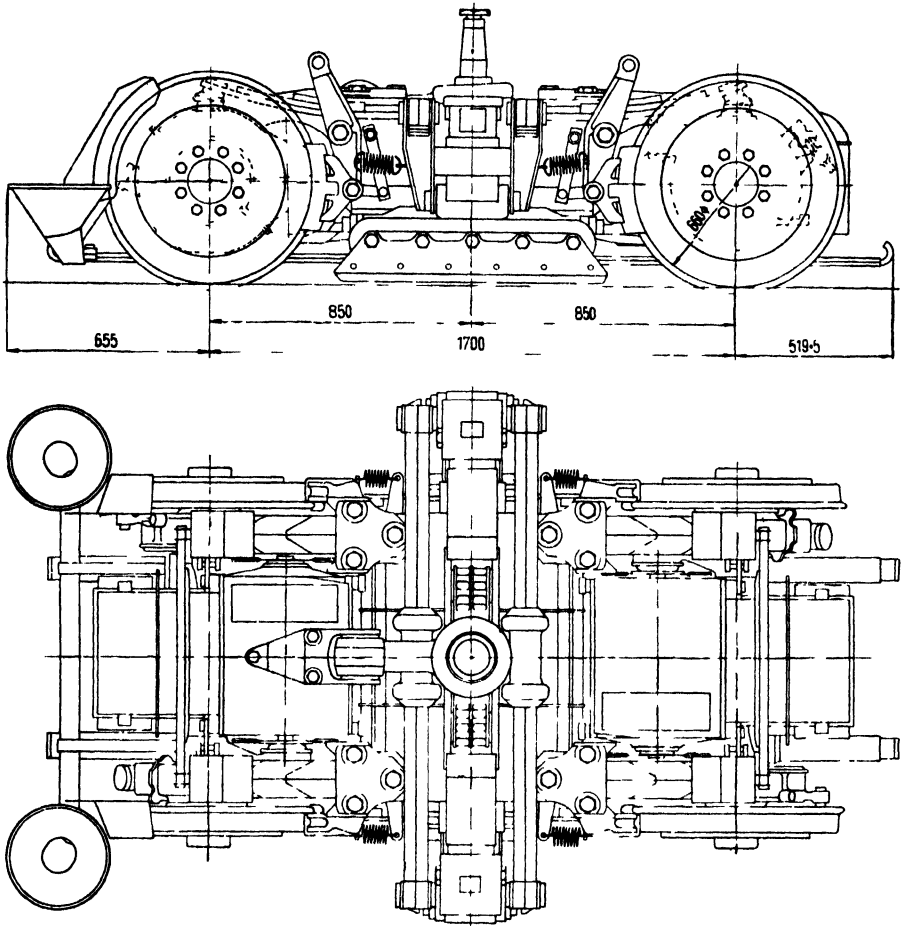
ELEVATION AND PLAN VIEWS OF BROWN BOVERI
